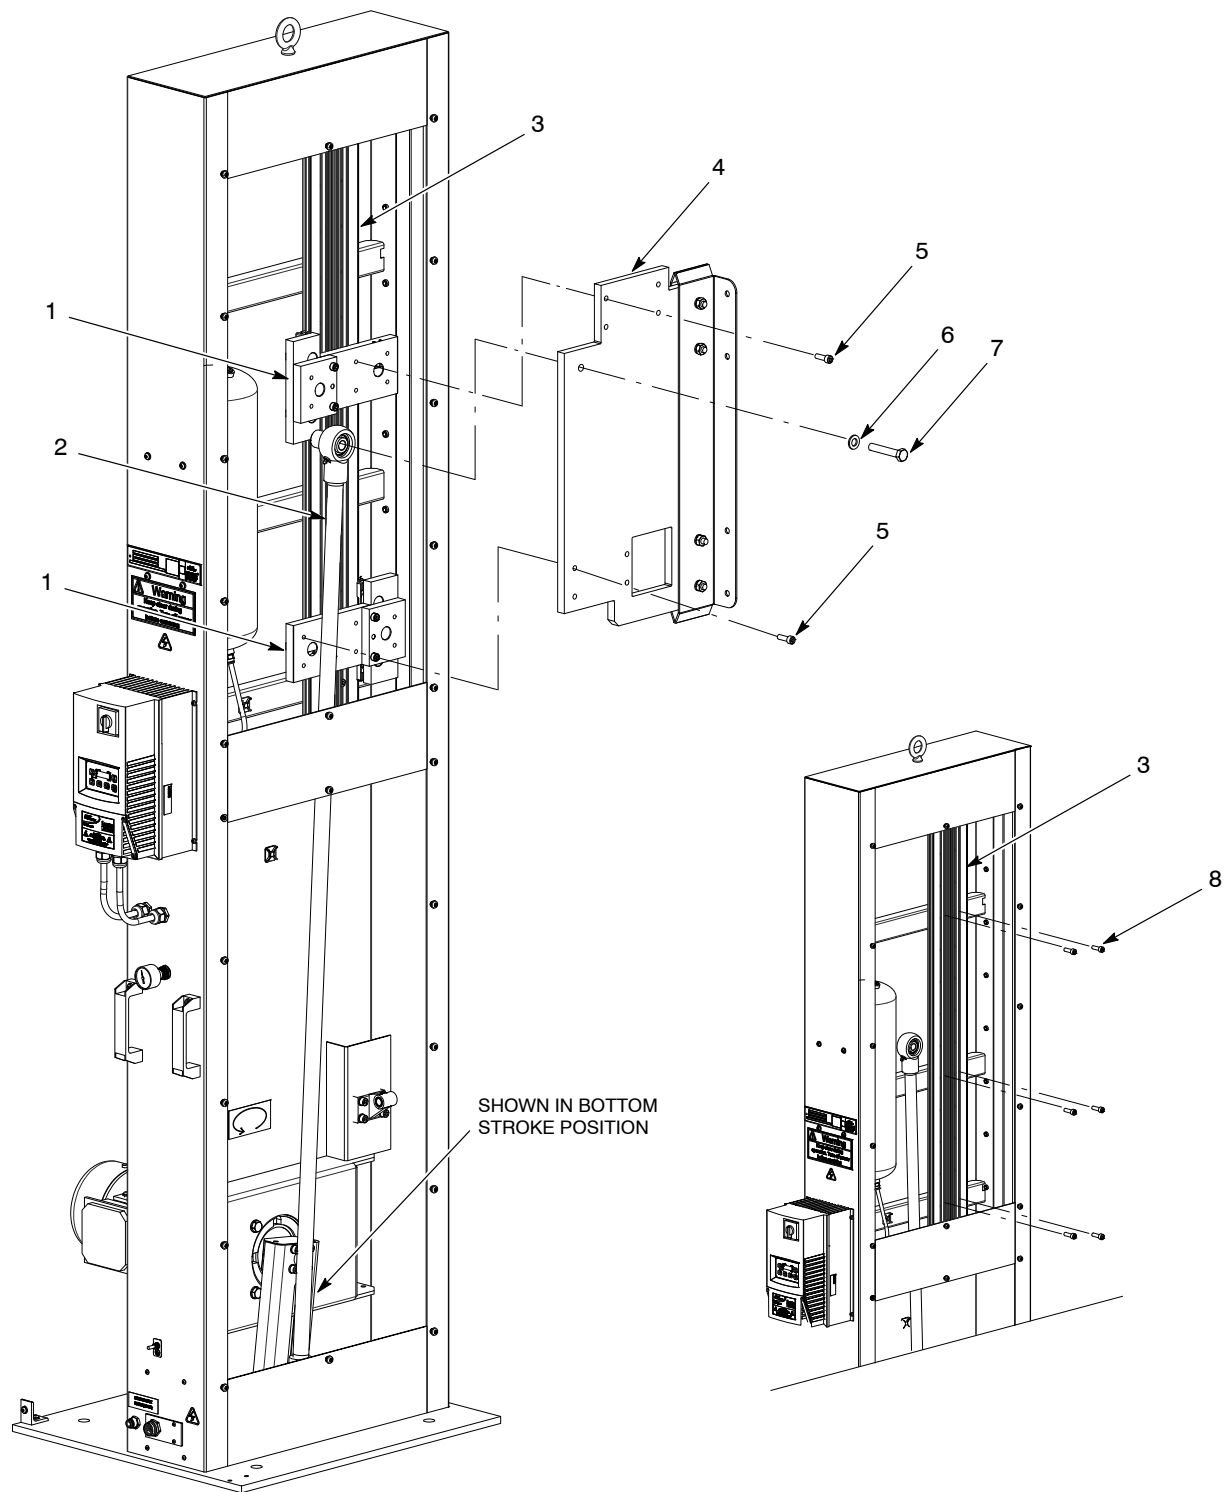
Installing the Carriage and Gun Mounting Plate Assemblies
